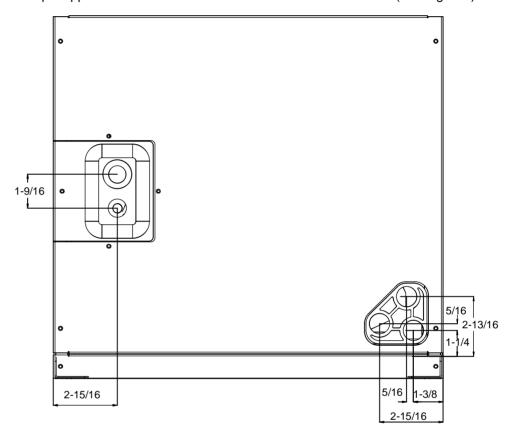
DIMENSIONS FOR FRONT CONNECT COIL
